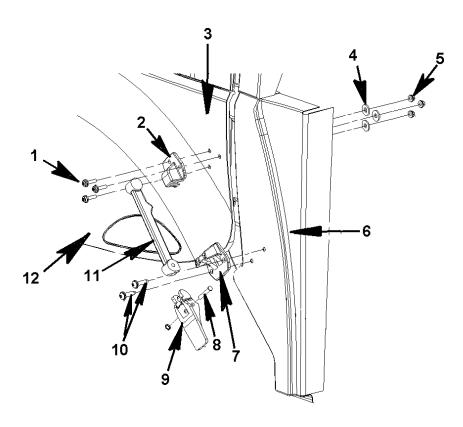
Upper Hood / Fender Latch Attachment — Driver Side Shown
